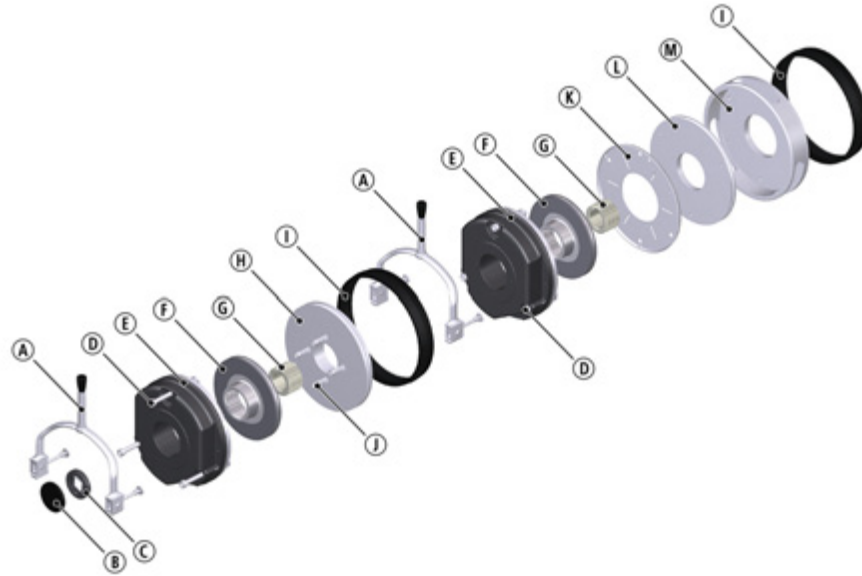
Double spring-applied brake INTORQ BFK458-06 to 25
